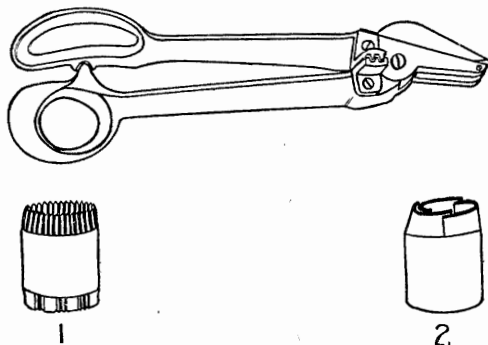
Double Cutting Shears with Pipe Crimper. 1, Crimped with Attachment Fitted to Shears; 2, Old Method.
